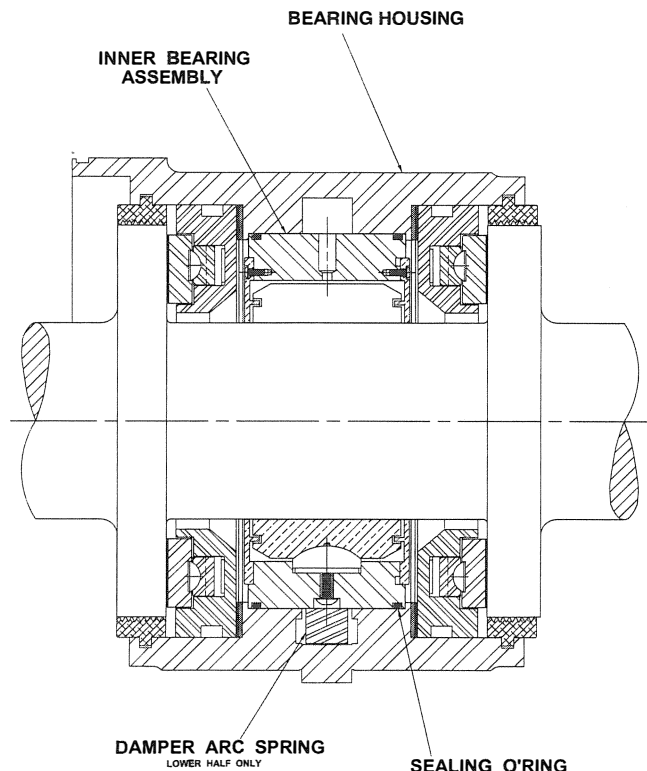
Steam End Squeeze Film Damper Bearing Schematic.
